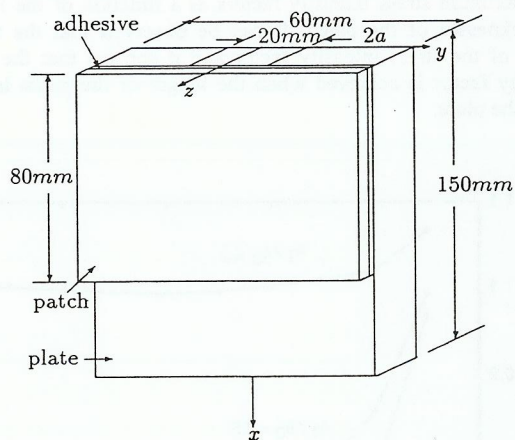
A cross-section showing the plane containing the crack for a centrally cracked plate with one-sided bonded patch.
